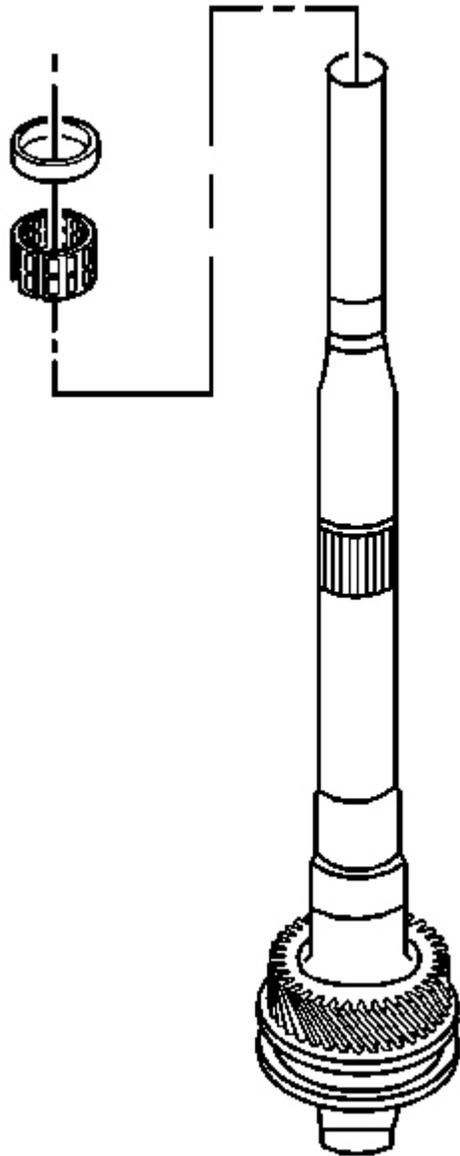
View Of 2nd Speed Gear Caged Needle Bearing & Bearing Spacer
